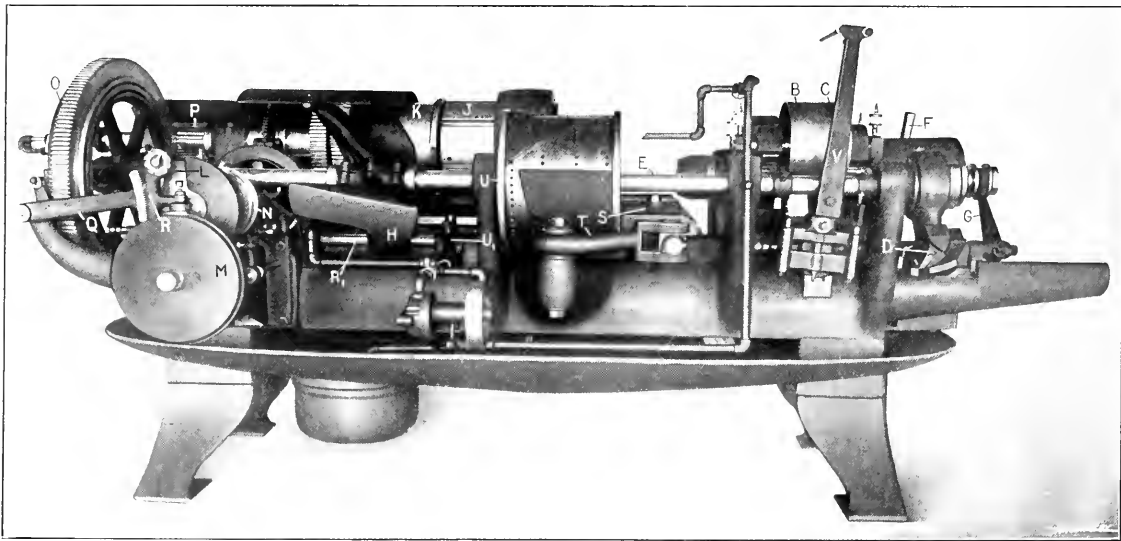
Rear View of the Cleveland Full Automatic Screw Machine
